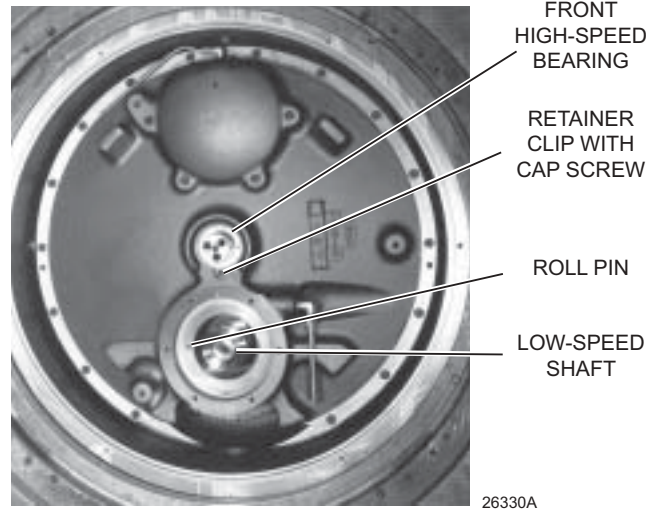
LOW-SPEED BEARING REMOVED WITH HIGH-SPEED BEARING IN PLACE
